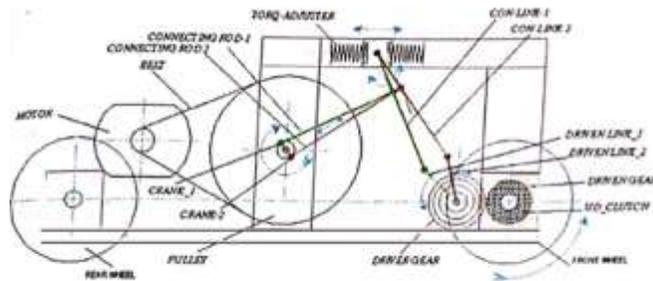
Actual Assembly of Torque Adjuster Mechanism
